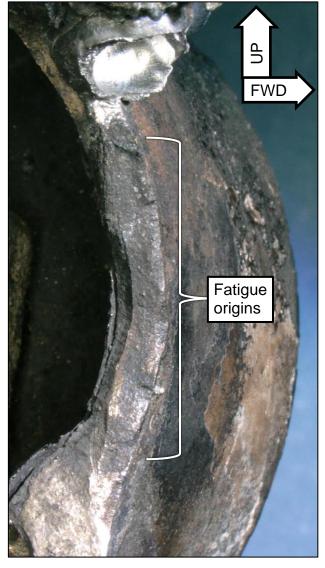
Fracture surface on the forward side of the right NLG actuator attachment foot after cleaning and oxide removal.
